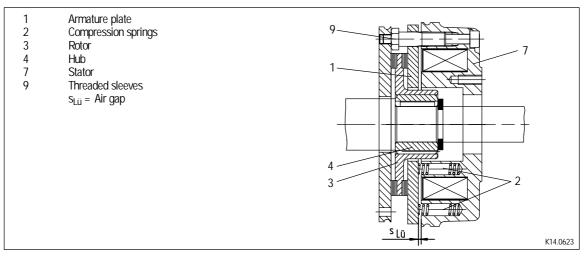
Design of the spring-operated brake BFK458: basic module N (complete stator) + rotor + hub + flange
